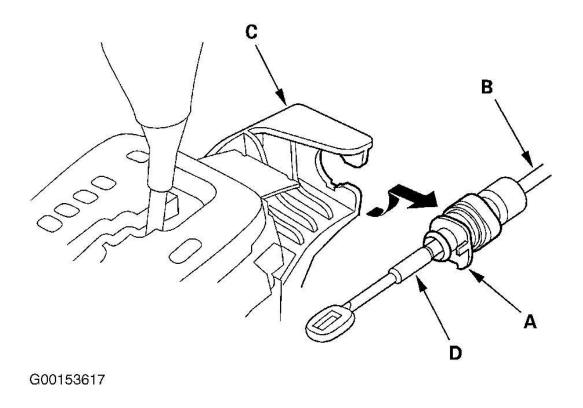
Removing Shift Cable From Bracket Base Courtesy of AMERICAN HONDA MOTOR CO., INC.
